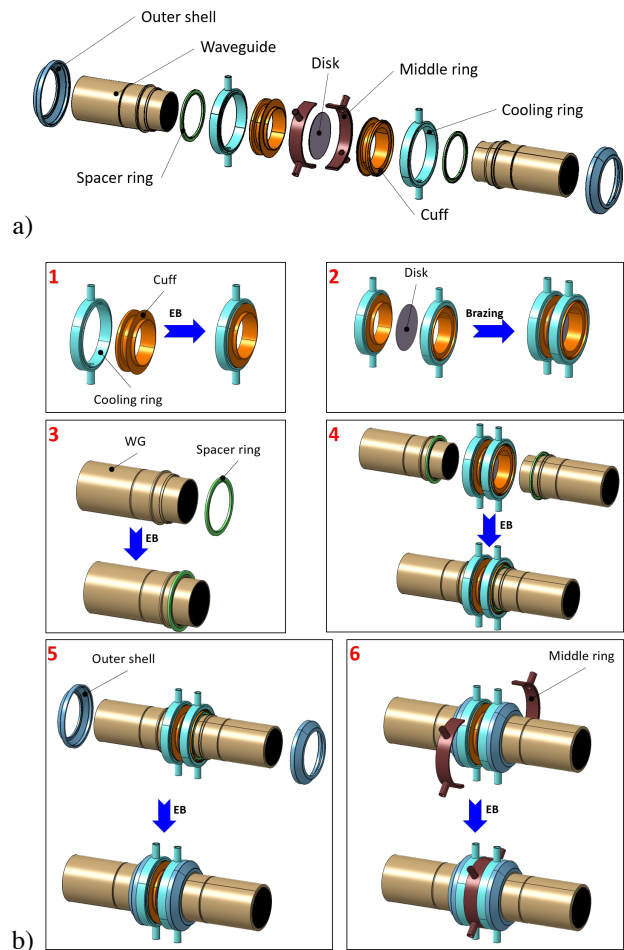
Exploded view (a) and assembling sequence (b) of the diamond window unit optimized by FEM analysis.
